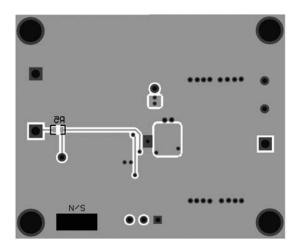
AAT1219 Evaluation Board Bottom Side Layout
